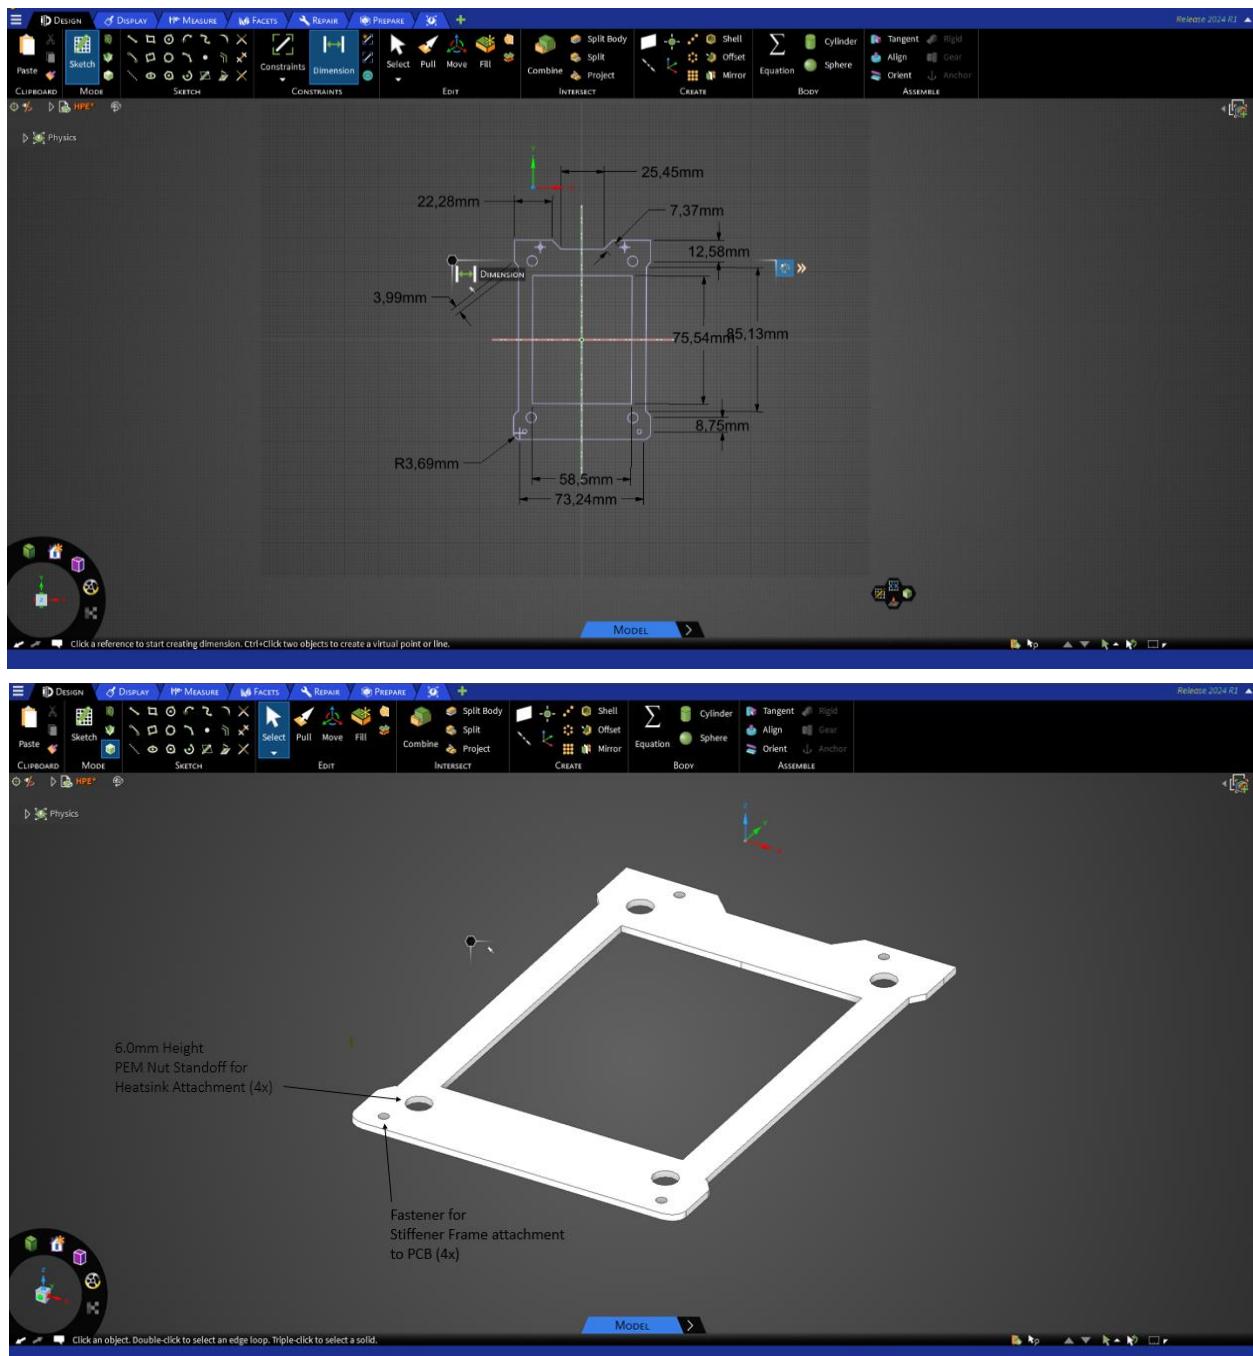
SP3 Socket Heatsink Attachment Mechanism – Design and Specifications
